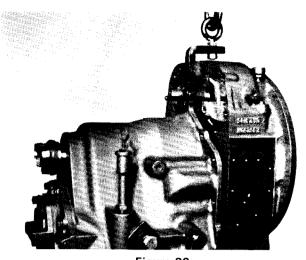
Support converter housing with a chain hoist. Remove remaining bolt.
